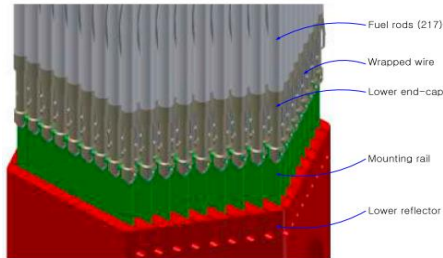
Fuel rod bundle with the mounting rail and lower reflector [5]
